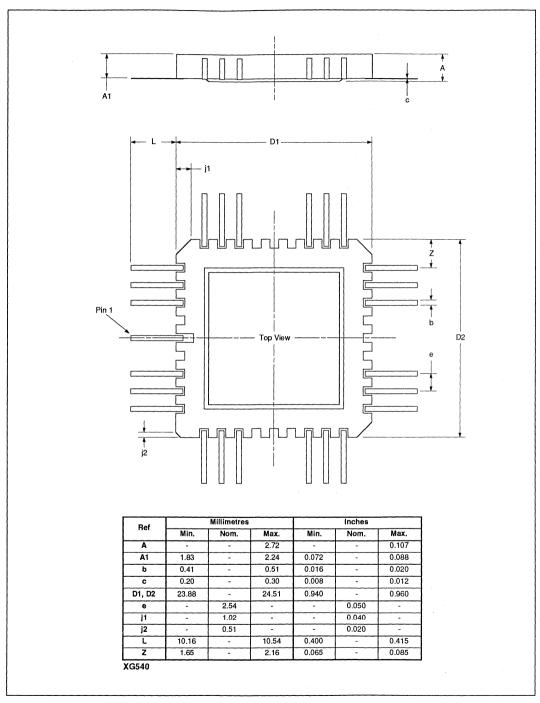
68-Lead Topbraze Flatpack - Package Style F
